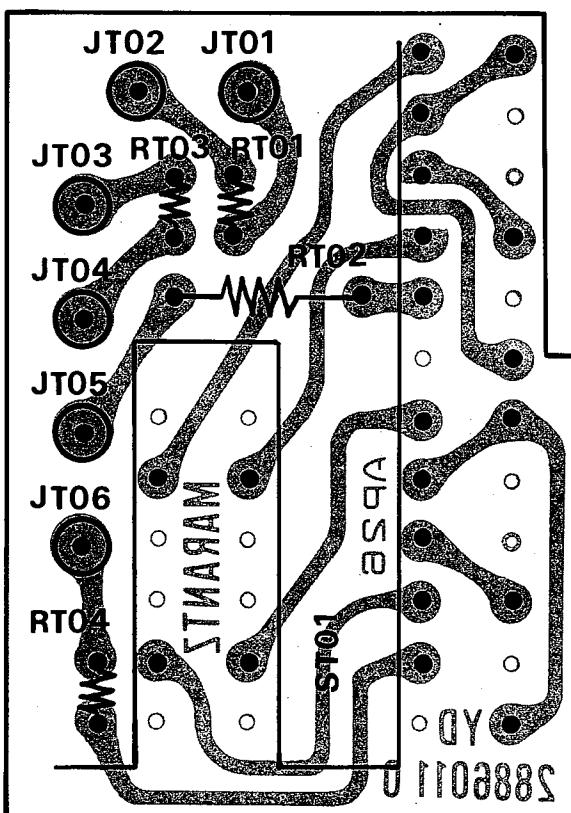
Tape Monitor Switch Unit Assembly PT01 Component Locations
